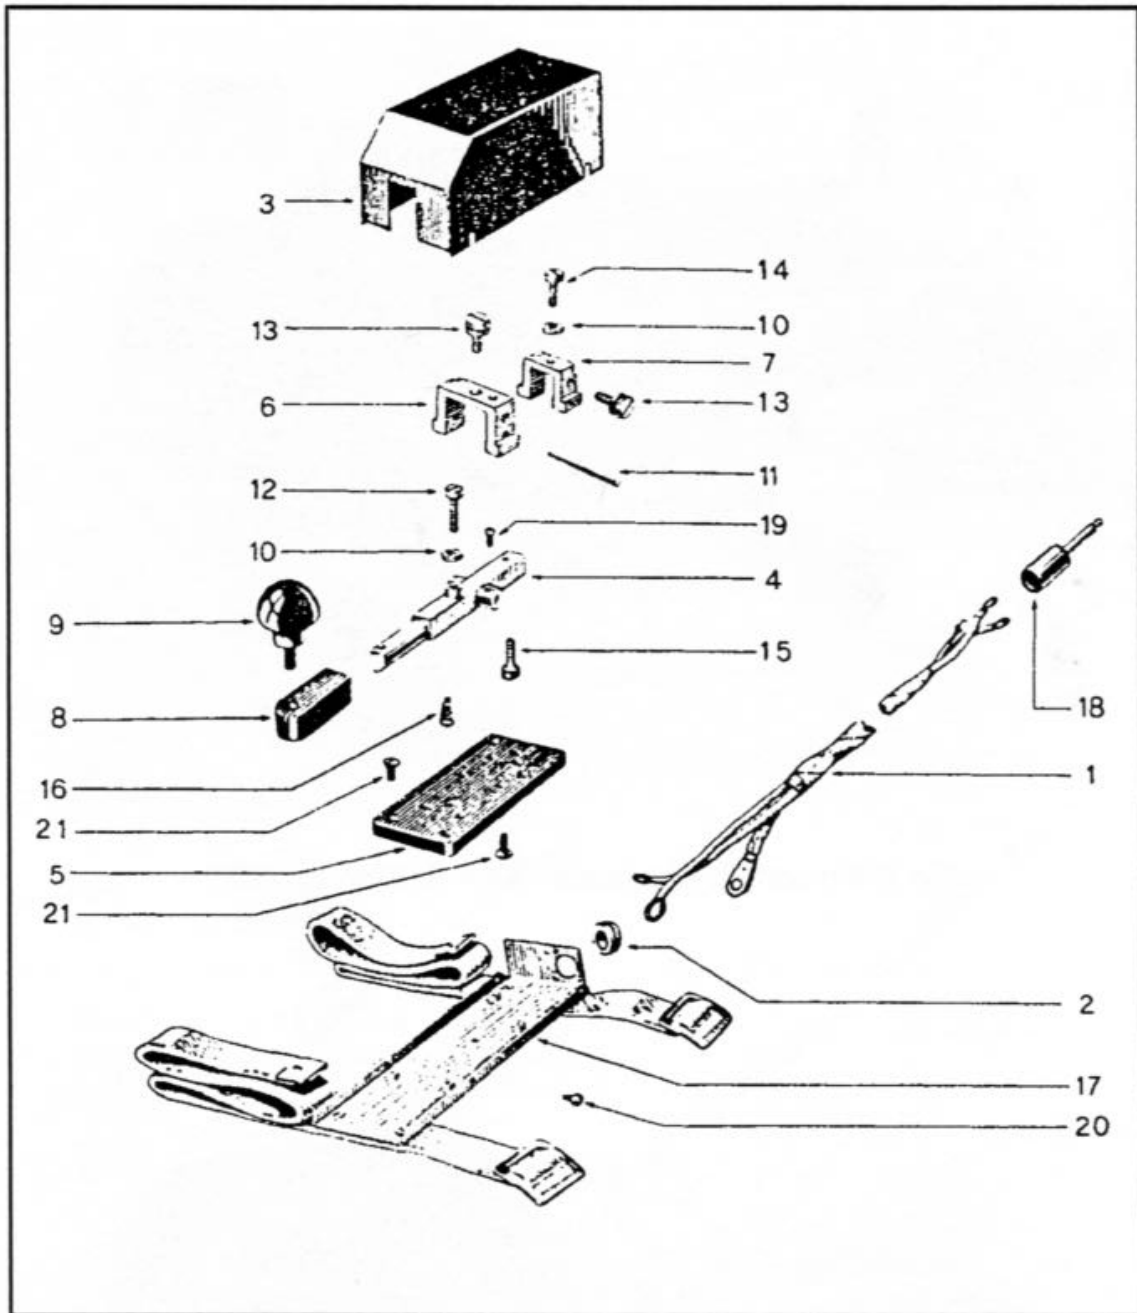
Key and Plug Assemblies, CDN, No. 9. Type 1 (ZA/CAN 1643),
